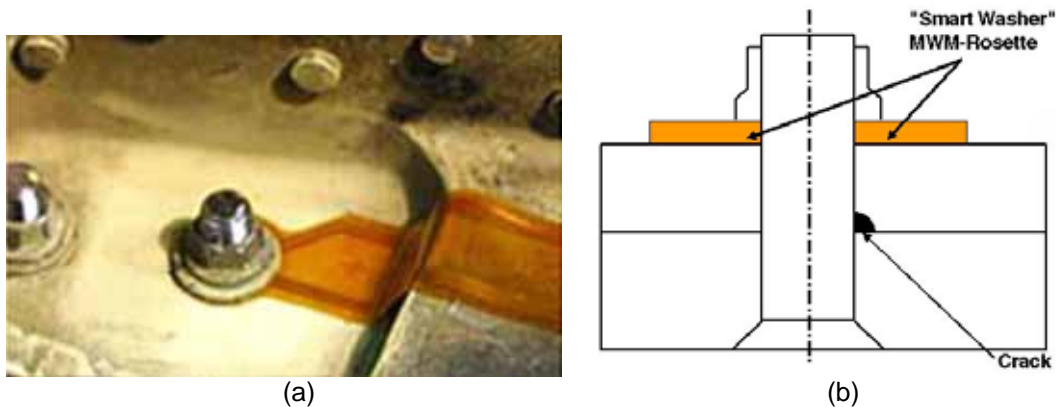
(a) MWM-Arrays mounted to monitor fatigue cracks at bolt holes on an aircraft structure; (b) example fastener geometry with sensor location.
